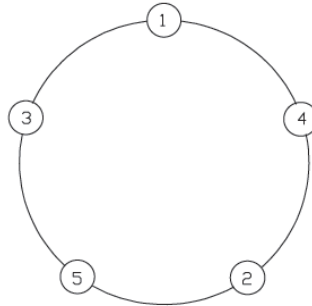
Brake Drum Mounting Bolts – Tightening Sequence
